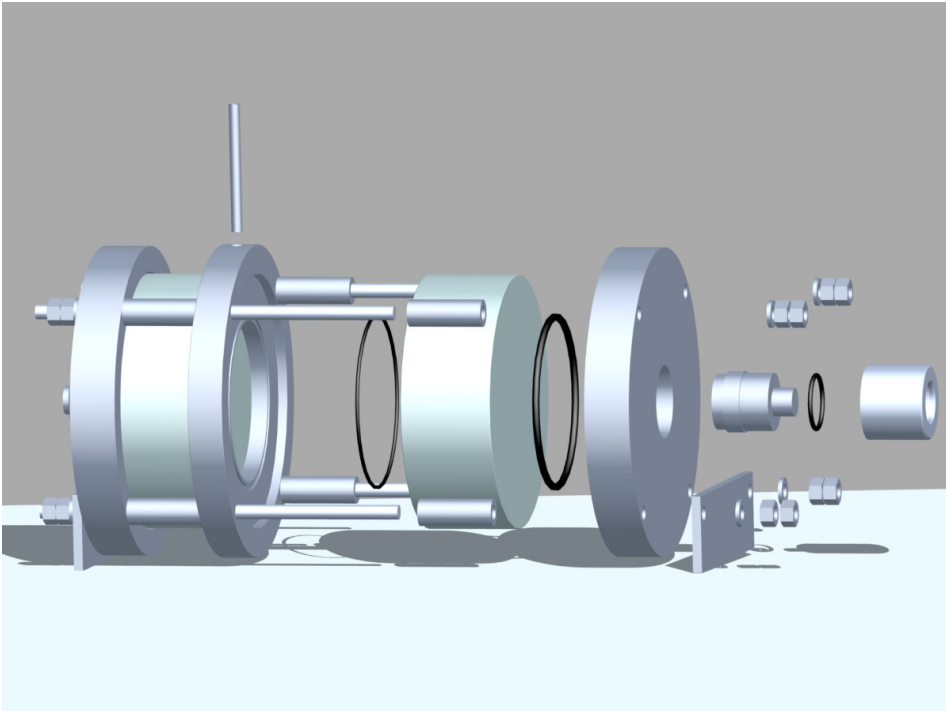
Exploded assembly drawing of proposed measuring cell.
